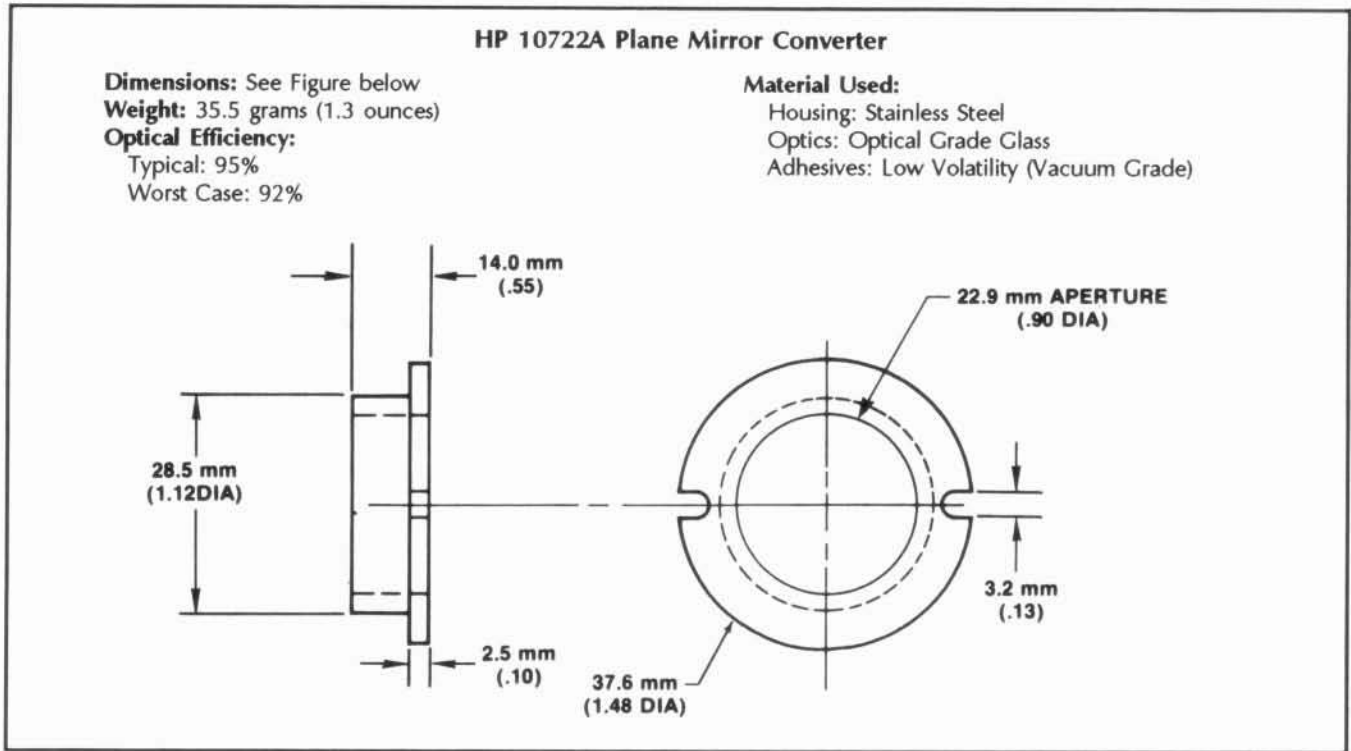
HP 10722A Plane Mirror Converter, Dimensions
